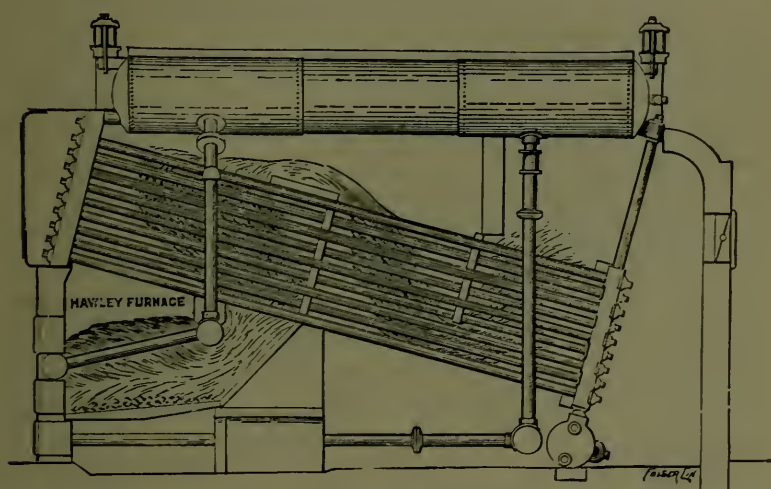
The Hawley furnace applied to horizontal water-tube boiler with sectional headers.
